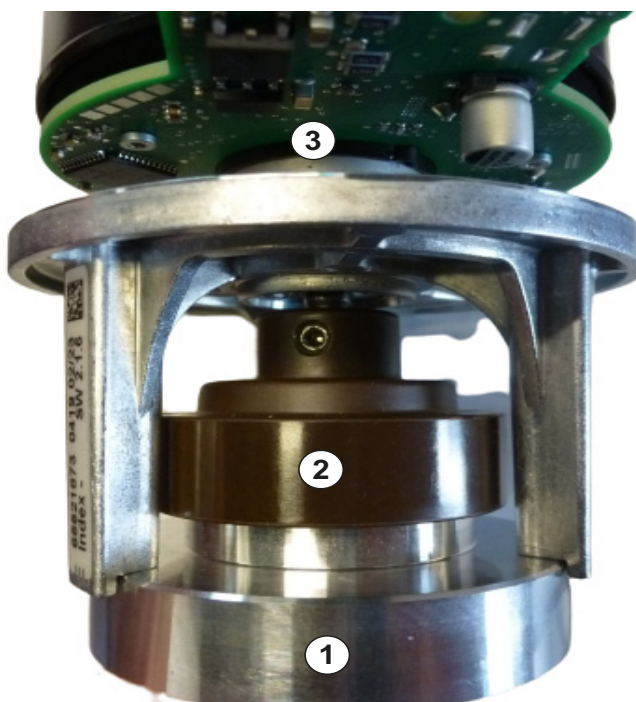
Gear pump magnet with screw to be screwed in
